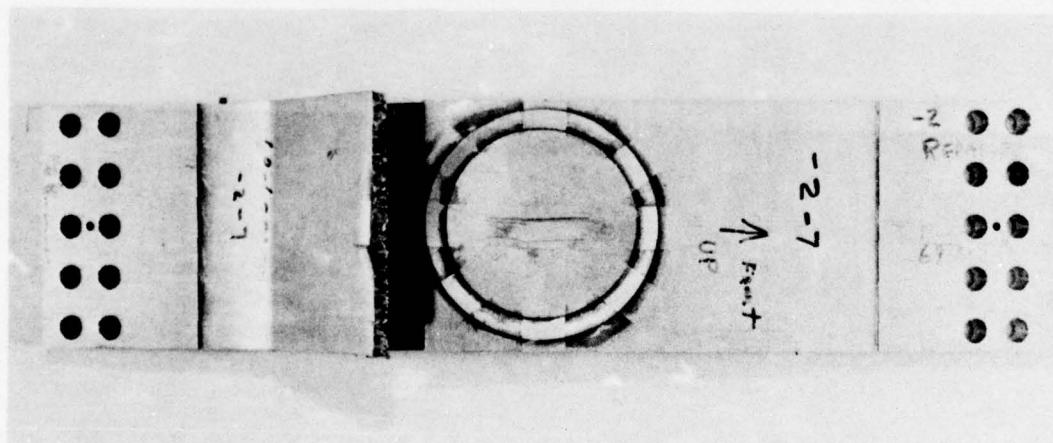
Typical Fatigue Failure—Repaired Aluminum Specimen—AF130 Adhesive
